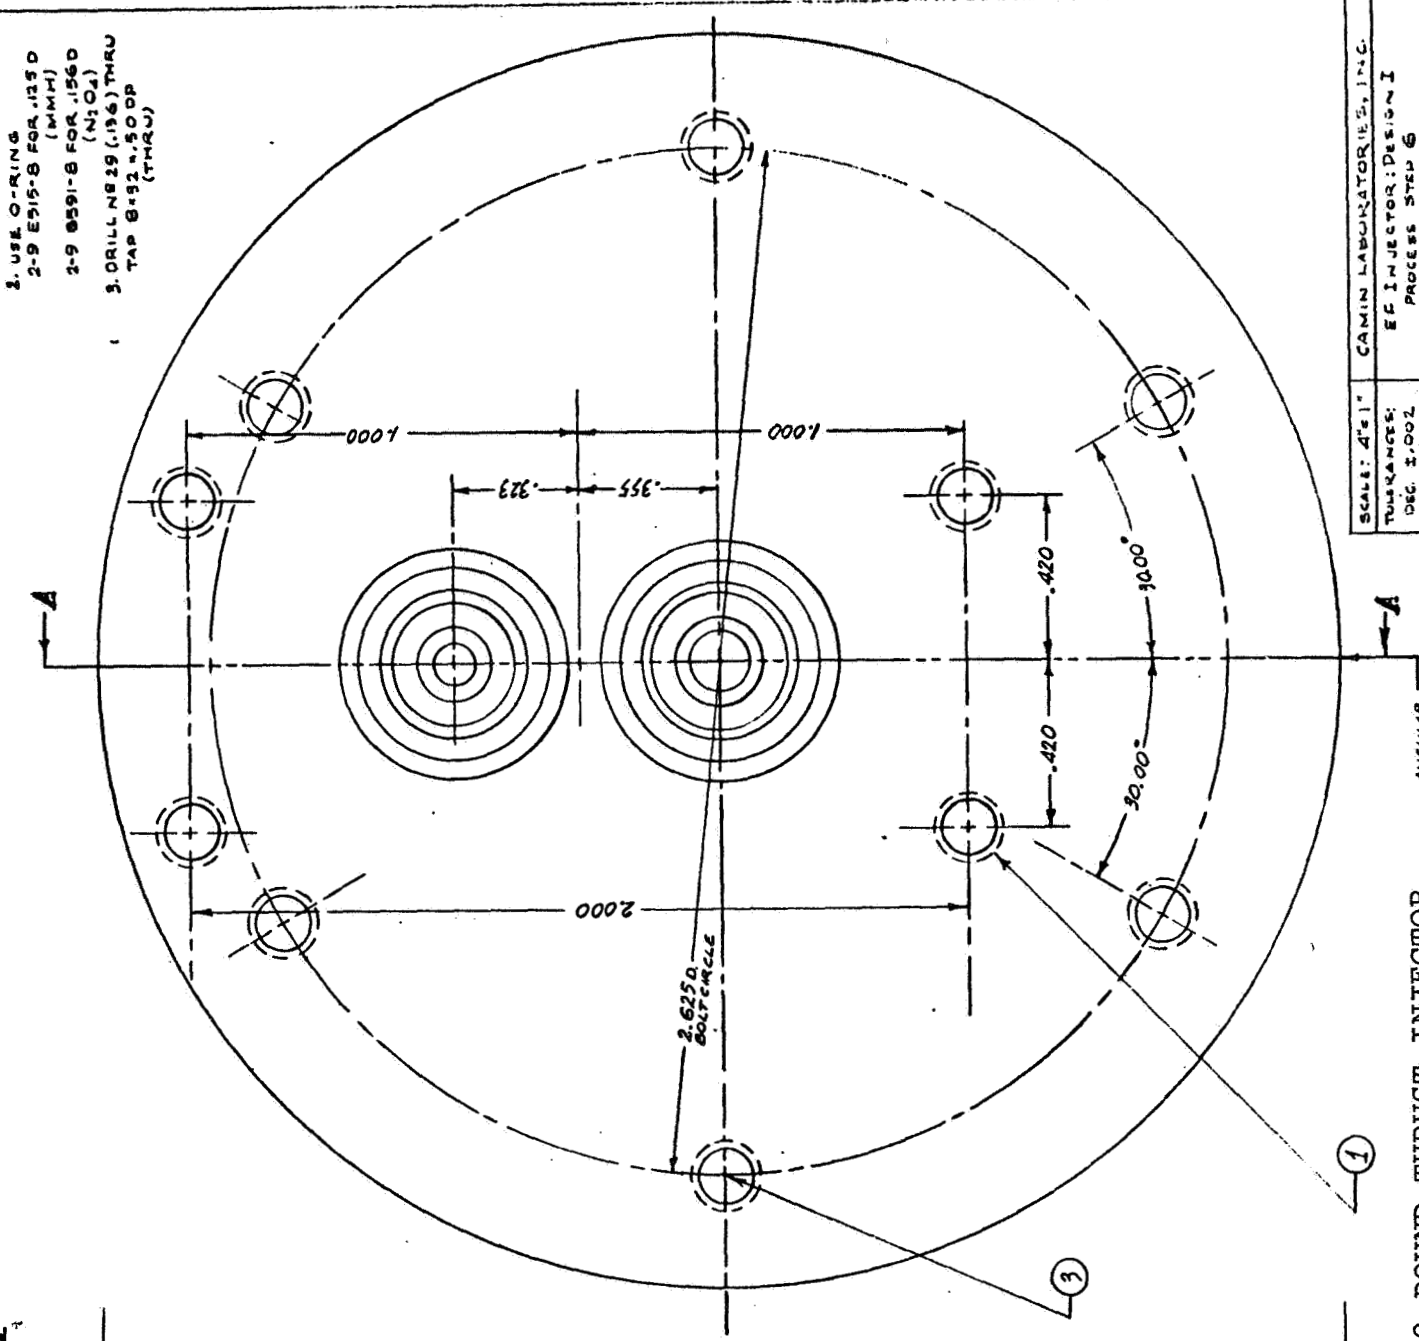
F. WORKING DRAWING FOR 100-POUND THRUST INJECTOR WITH IMPINGING JETS IN PRE-COMBUSTION CUP, DESIGN I
